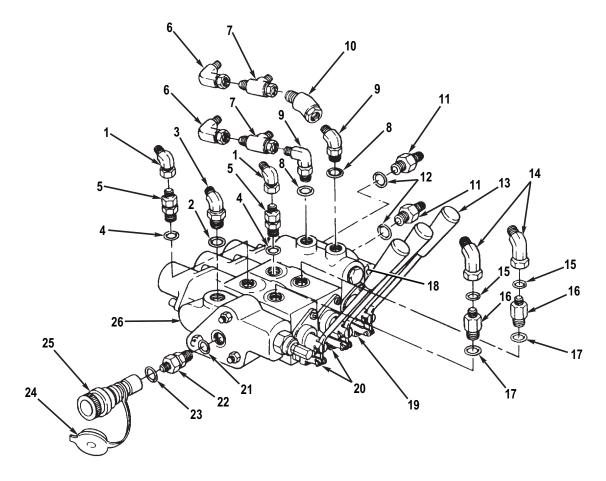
Hydraulic Control Valve (Front Dolly) Fittings Removal.
